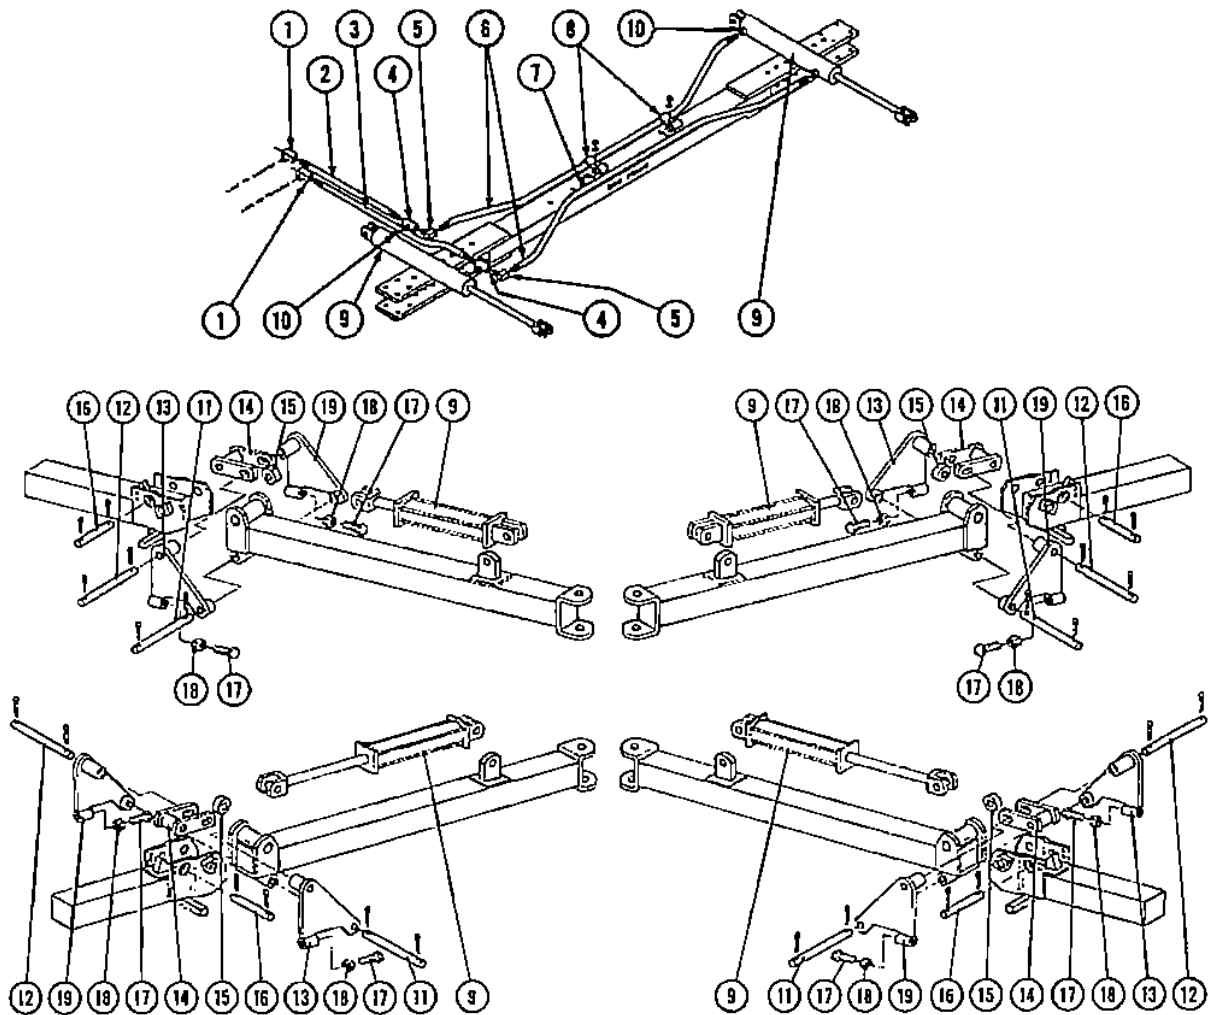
HYDRAULIC FOLDING ATTACHMENT
